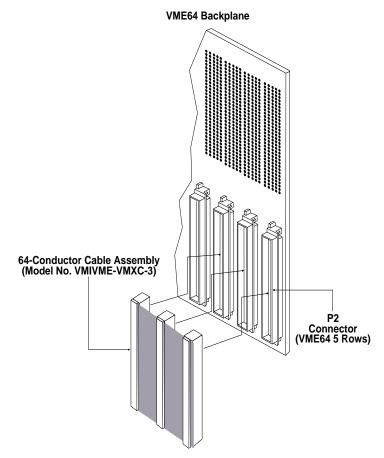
VME64 Backplane with 64-Conductor Cable Assembly
